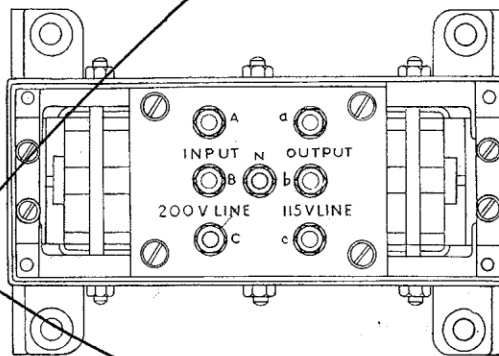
Typical terminal arrangement (Type RD 6609 shown)
